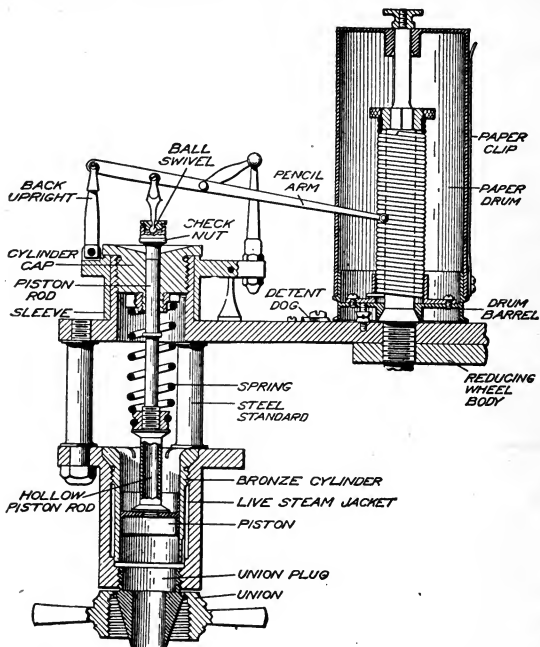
,533.—Trill outside spring indicator; cross section showing principal parts.
